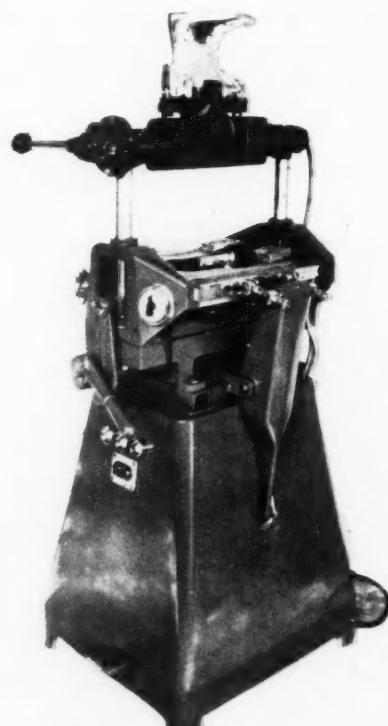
Nova NVP 57/P which may be used as either low- or high-pressure machine
